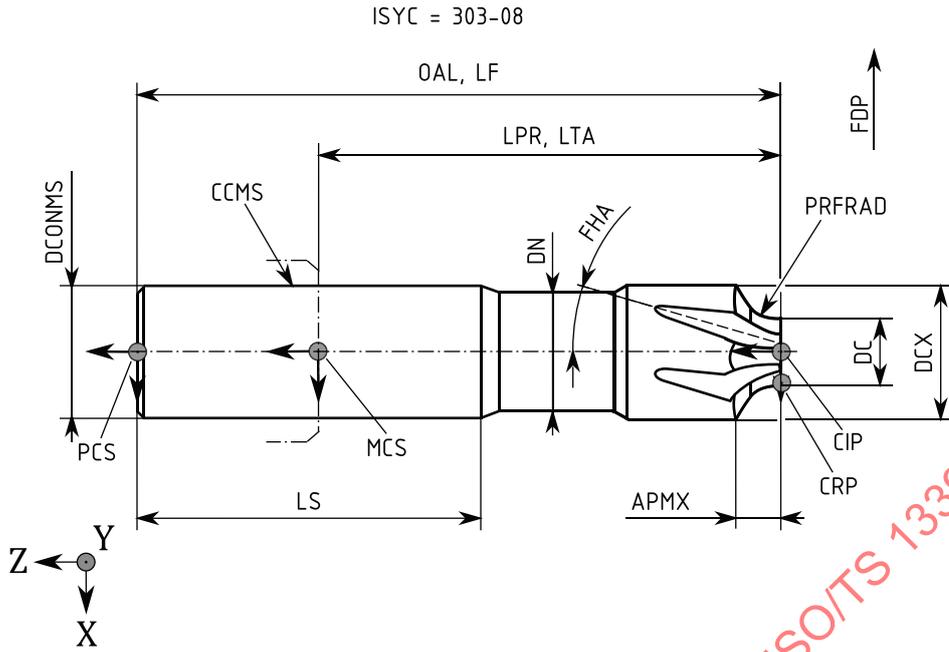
ISYC 303-08 - Rounded profile end mill, concave, solid
